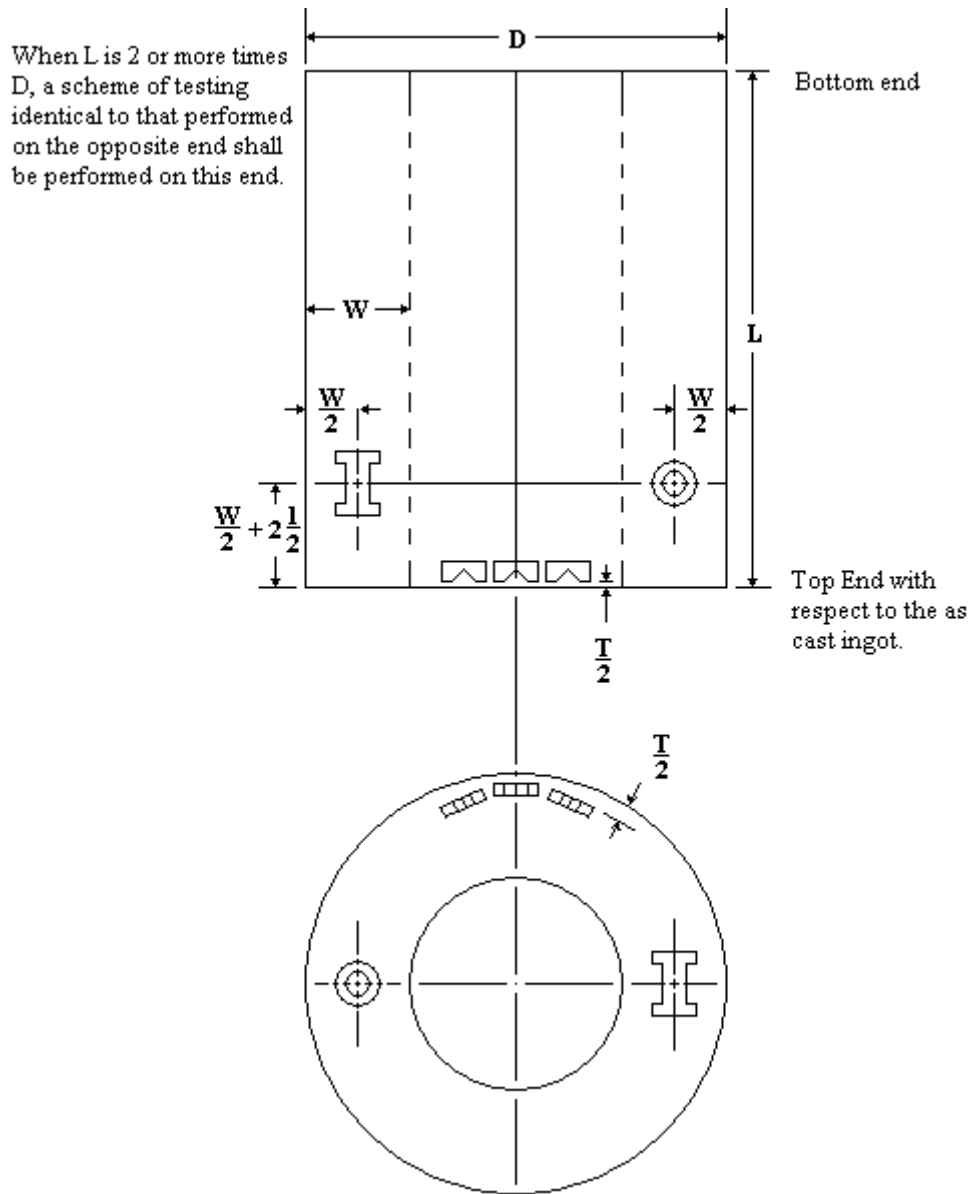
Typical Schematic Diagram of Test Specimen Location for 6-Inch Thick Forgings of Hollow Circular Cross-Section. (See C.4.4.2.2 for details on test specimen location.)
